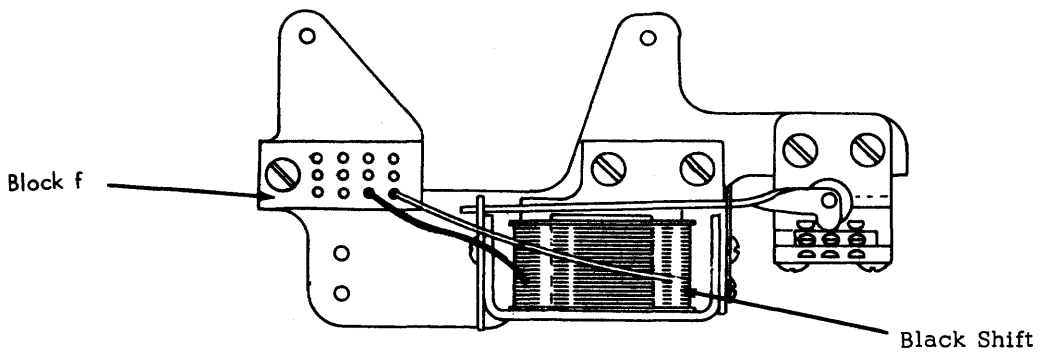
1 Magnet Red Ribbon Shift Assembly
